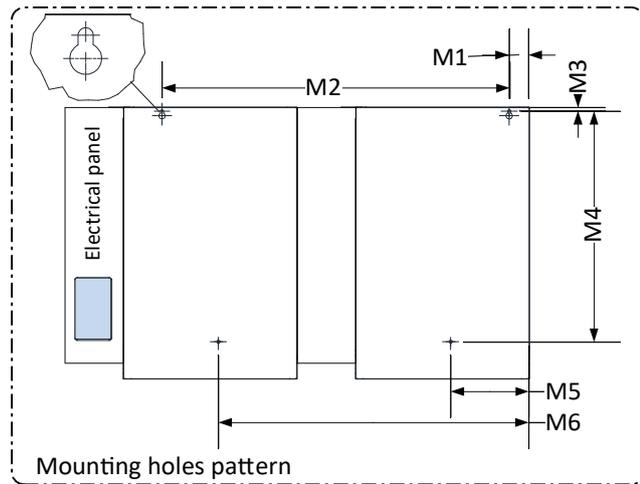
, mounting holes double module (IER24, 34, 44 & 62)
